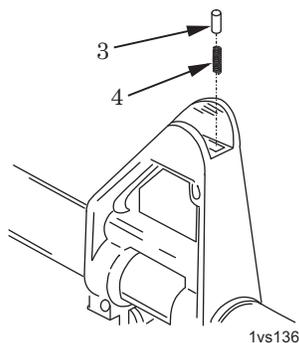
Removal/Installation of Front Sight Detent and Spring.
